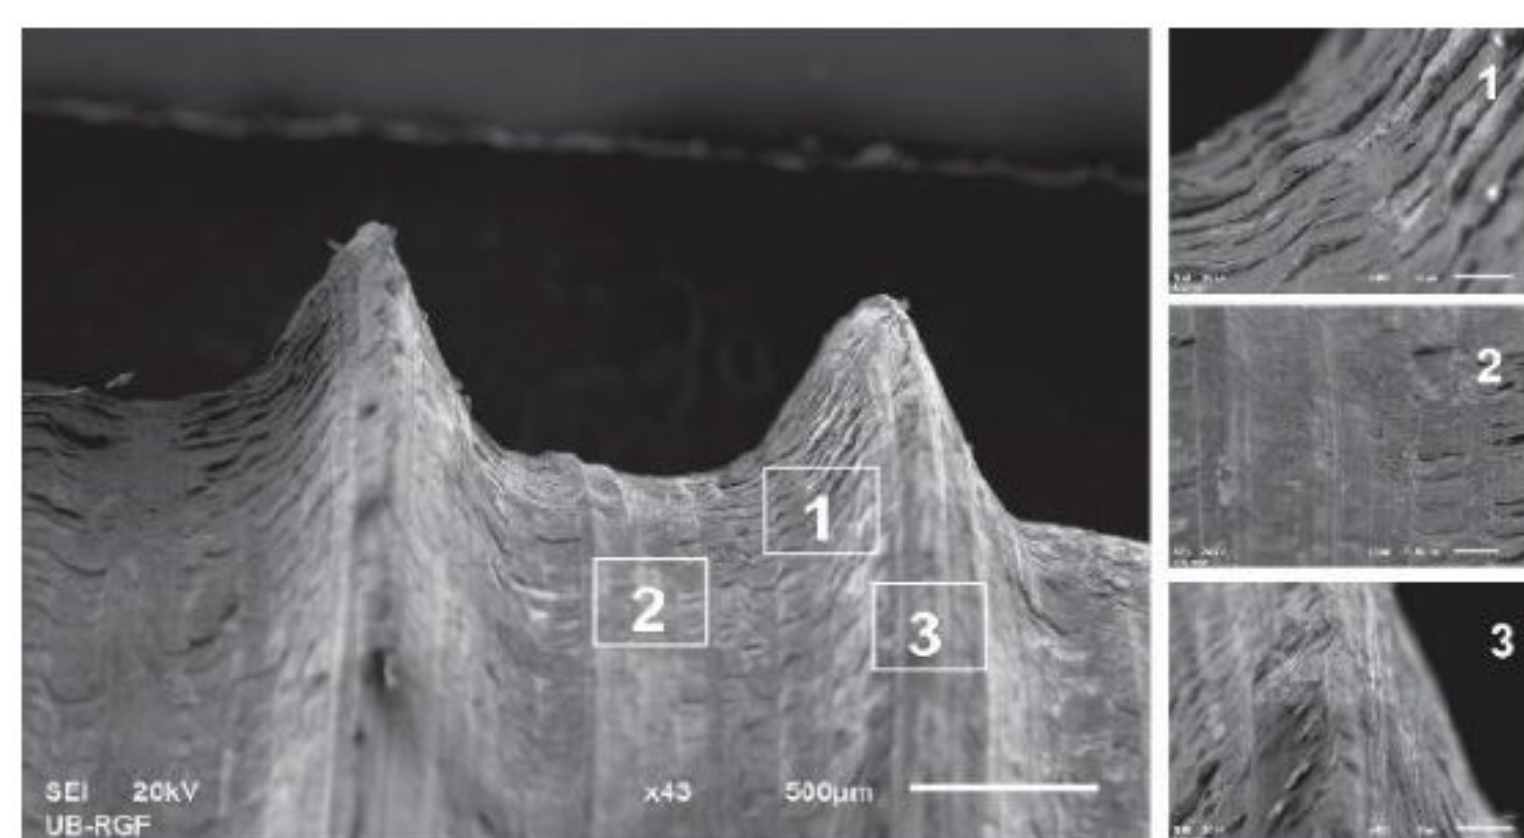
Electron microscope images: (right) – cold rolled thread; (left) 1 – side, 2 – bottom, 3 – top.
